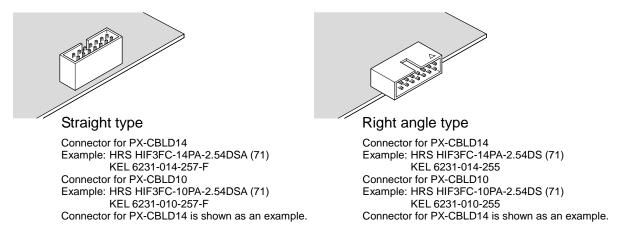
Target Board Connectors for DWire Connecting Cable
